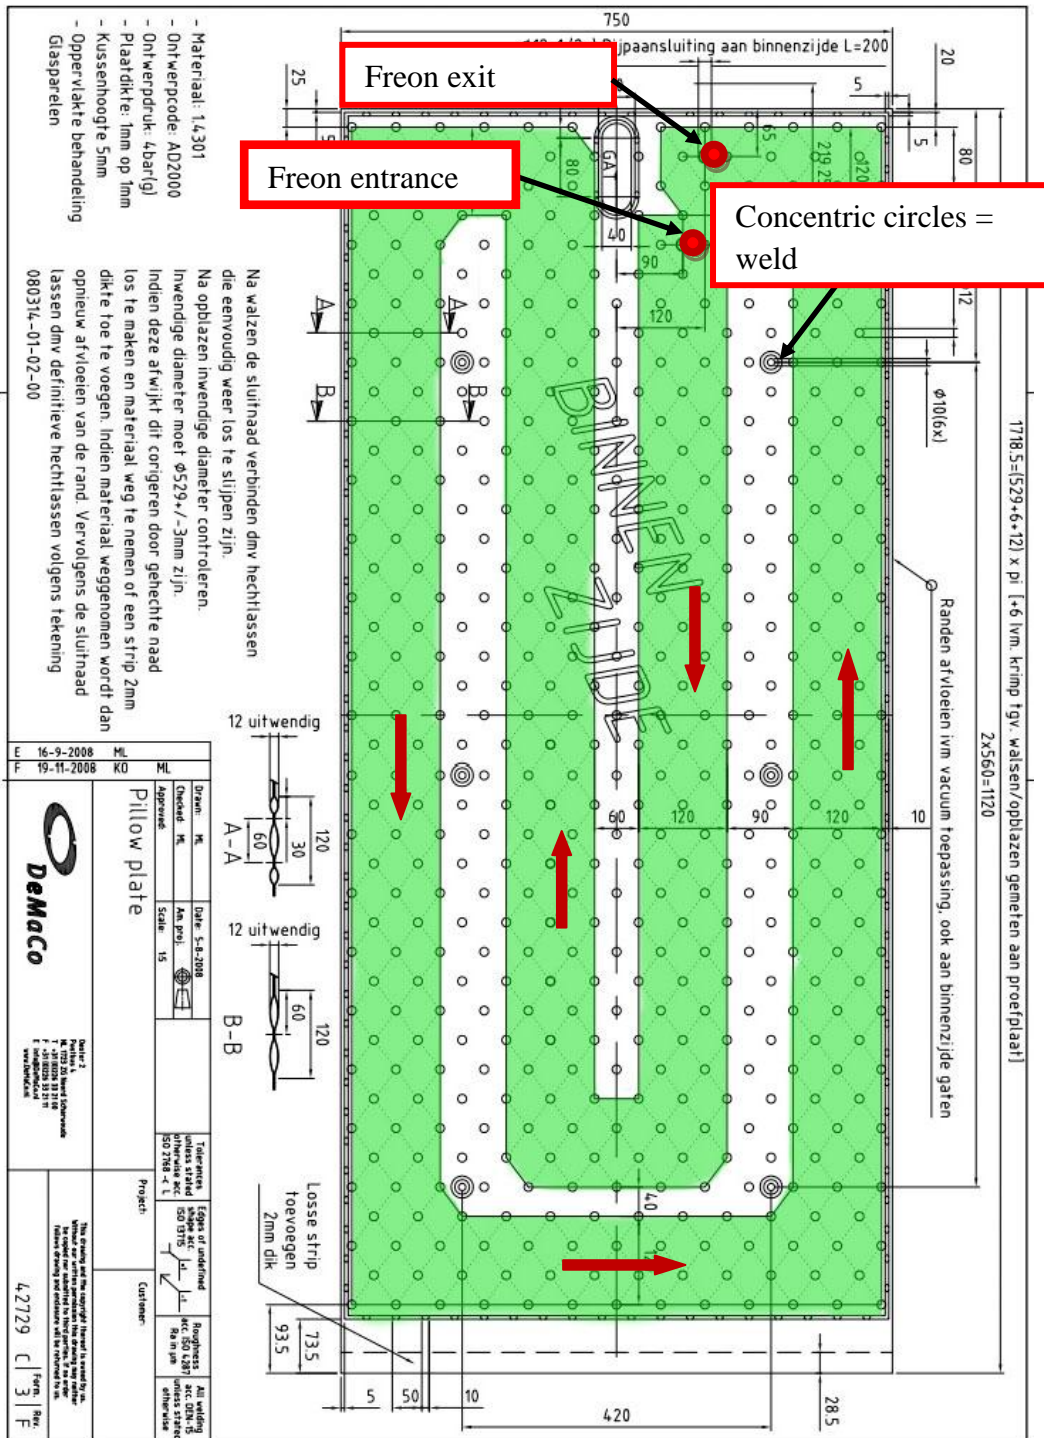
The initial design (in Dutch) and the dimension of the cooling plate. Freon enters from the red entrance hole and passes along the green path inside the cooling plate. Circles connect the two plates of cooling plate together but allow Freon to flow between the welds (area in green). There are six welds (concentric circles) plus one large oval weld in the cooling plate that fix the plates together and prevent Freon circulation; white areas.
